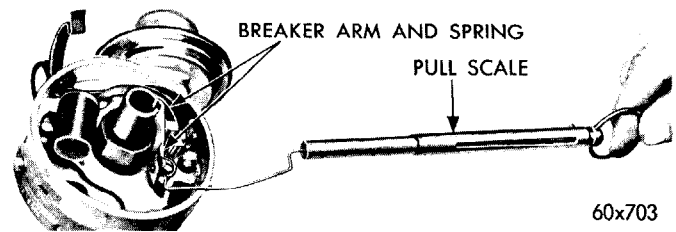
Testing Breaker Arm Spring Tension (6 Cylinder)
